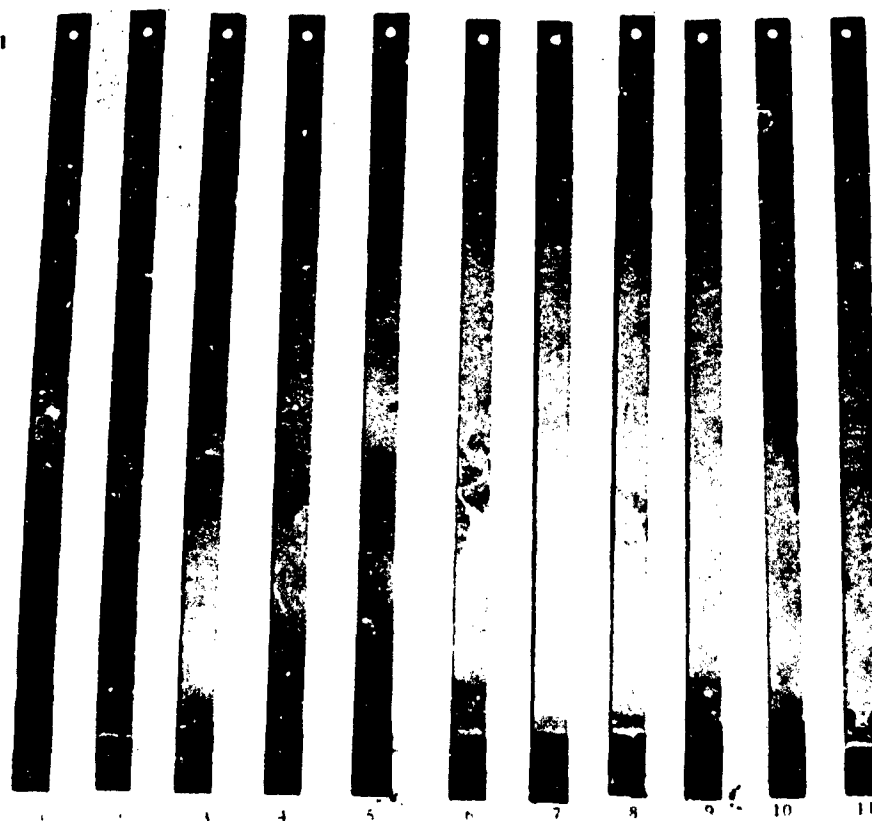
LOWER SURFACES OF STEEL STRIPS
